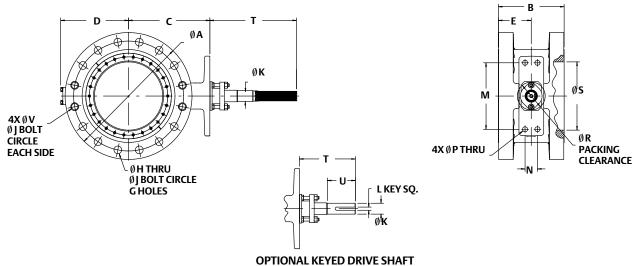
Dimensions and Weights, CL150 Double-Flange Valves (also see tables 5 and 7)
